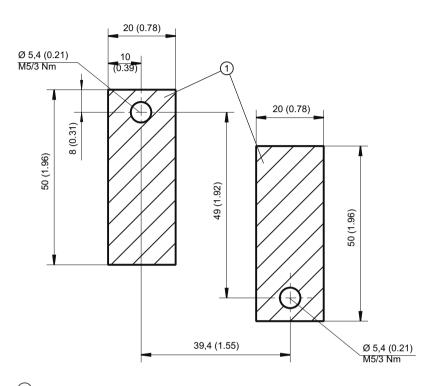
Dimension drawing of the DRIVE-CLiQ coupling, all dimensions in mm and (inches)
